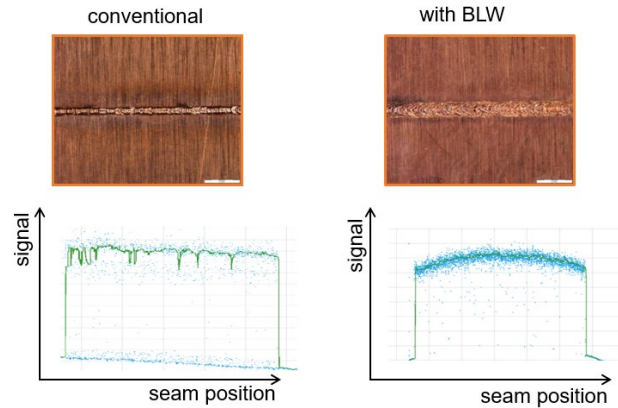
Welding of copper at 6 kW laser power and 15 m/min feed rate does not allow for a stable OCT-based keyhole signal (left). In contrast hereto, a stable keyhole measurement is obtained when using the beam shaping technique BrightLine Weld (right).
